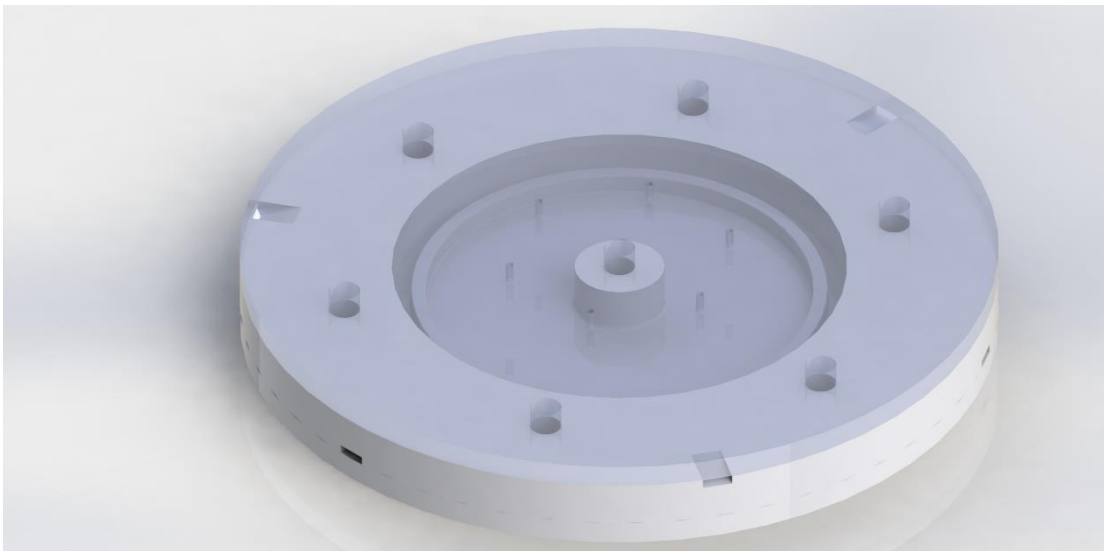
Rotor Cast Form, Final Version. With Slot Gaps In Centrepiece.
